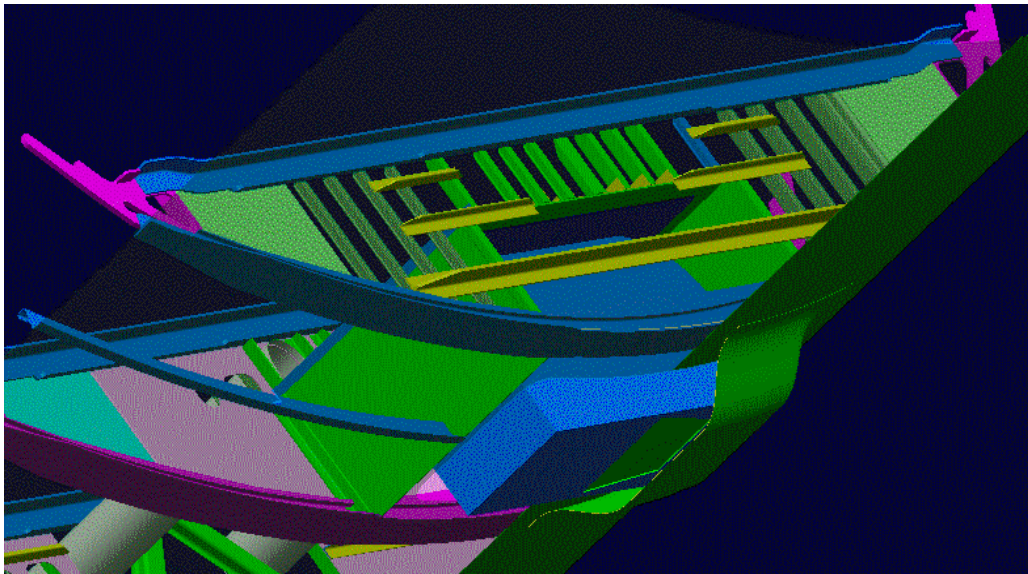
Cutaway View of Inbd/Outbd Fuselage Installation
